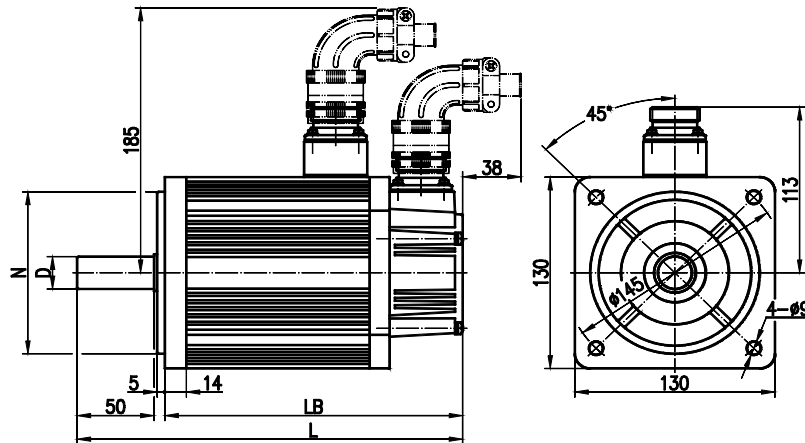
External view and installation dimensions of SJT series of AC servomotors with 130# base
